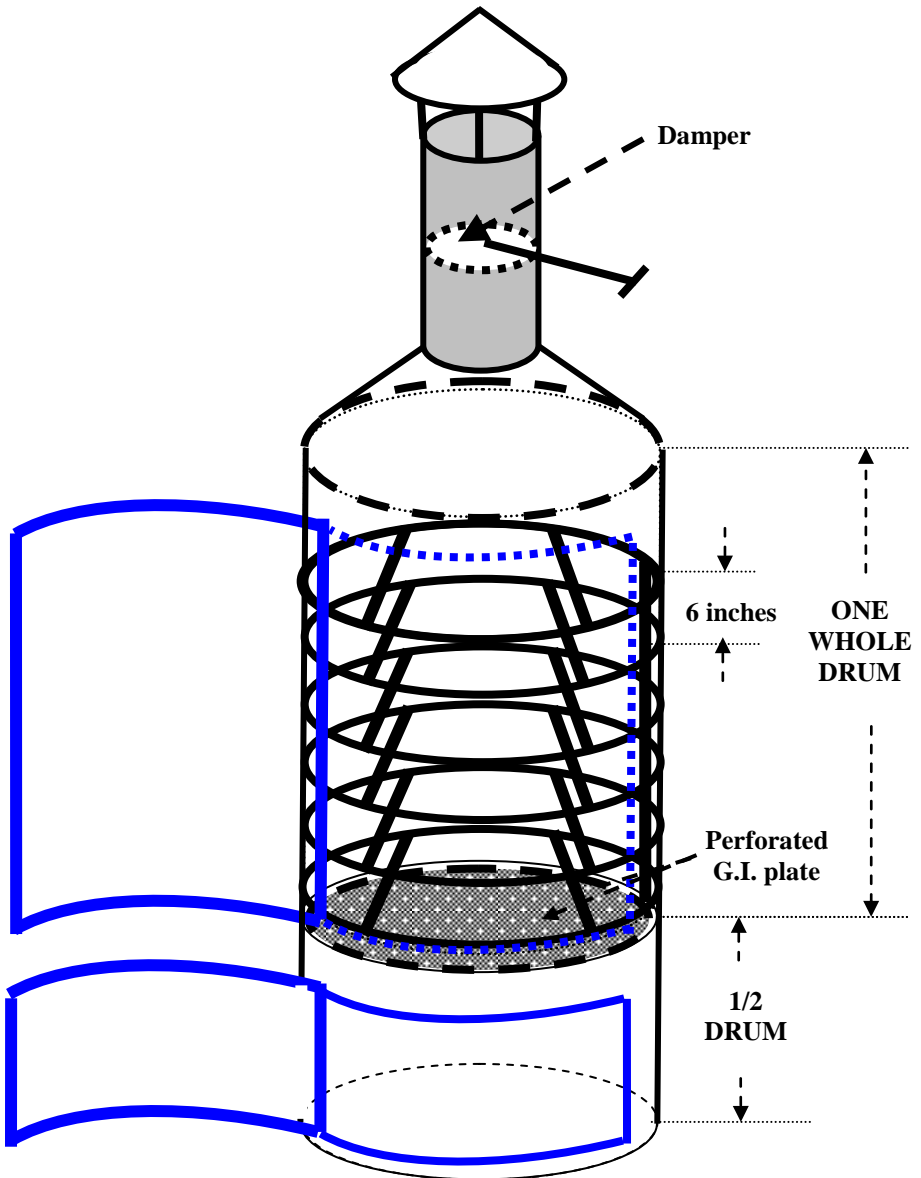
A smokehouse design from 1½ steel drums (or fabricated from rolled up and welded galvanized iron sheet gauge 18)
